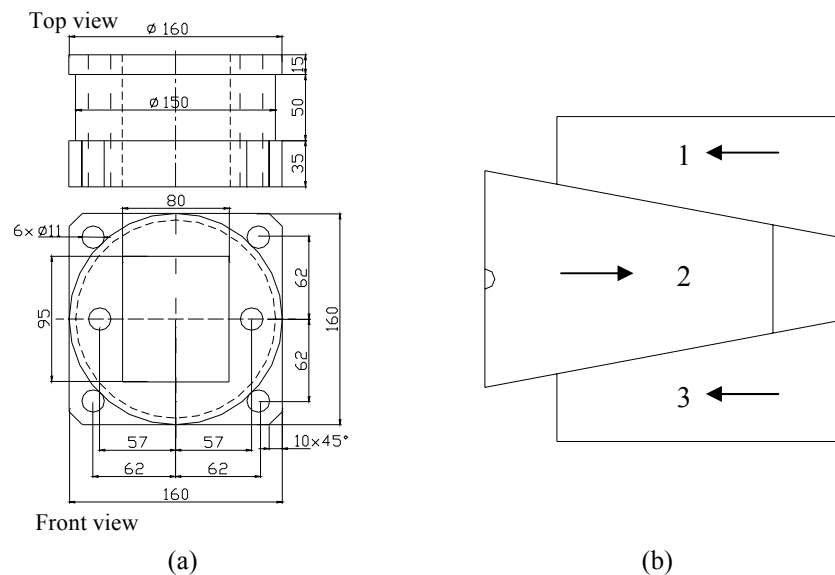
(a) Fixture details, (b) Sliding blocks used for fixing the longitudinal inside the fixture
